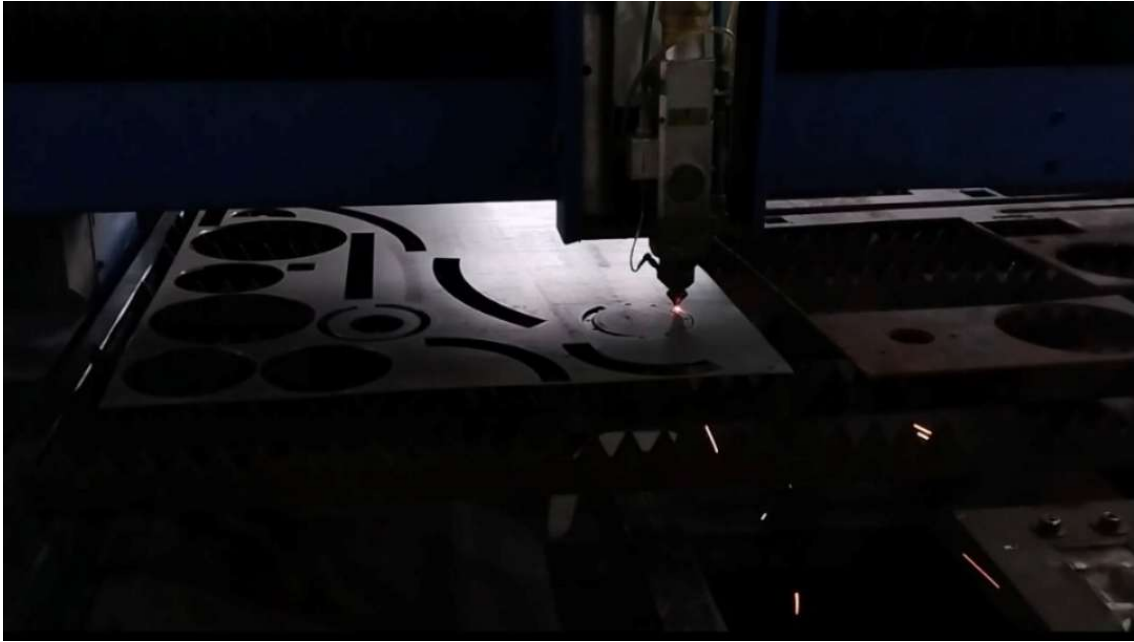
Figure Laser Cutting of Mild Steel Sheet (1 mm Thick)
